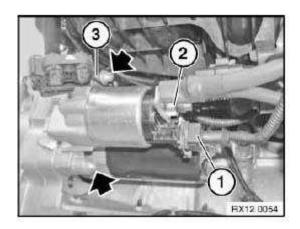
Identifying Bracket And Starter Motor With Unlock Plug Courtesy of BMW OF NORTH AMERICA, INC.
